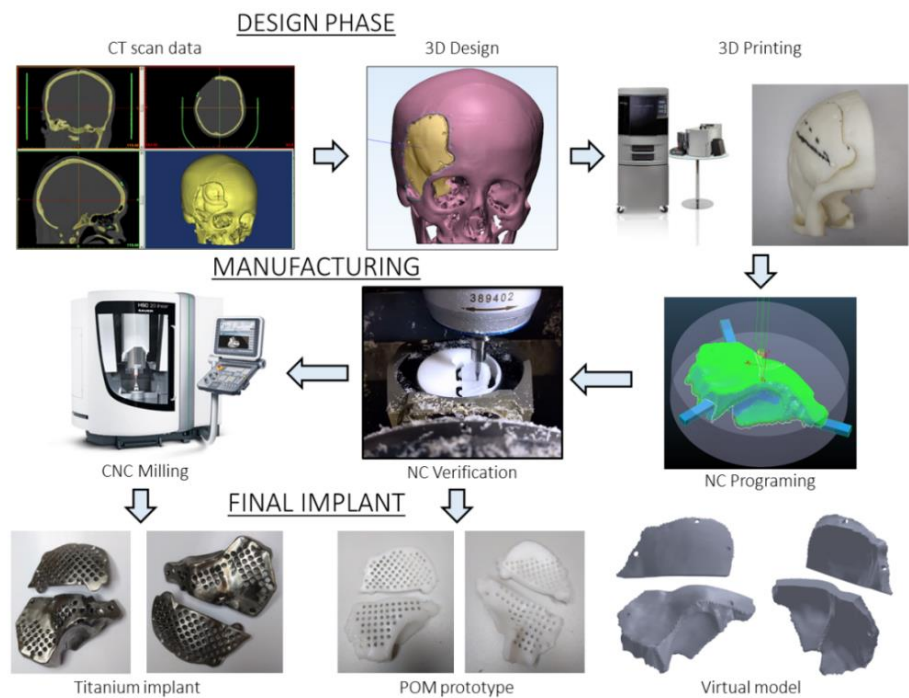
Innovative method for designing and manufacturing CAD / CAM manufactured implants.
